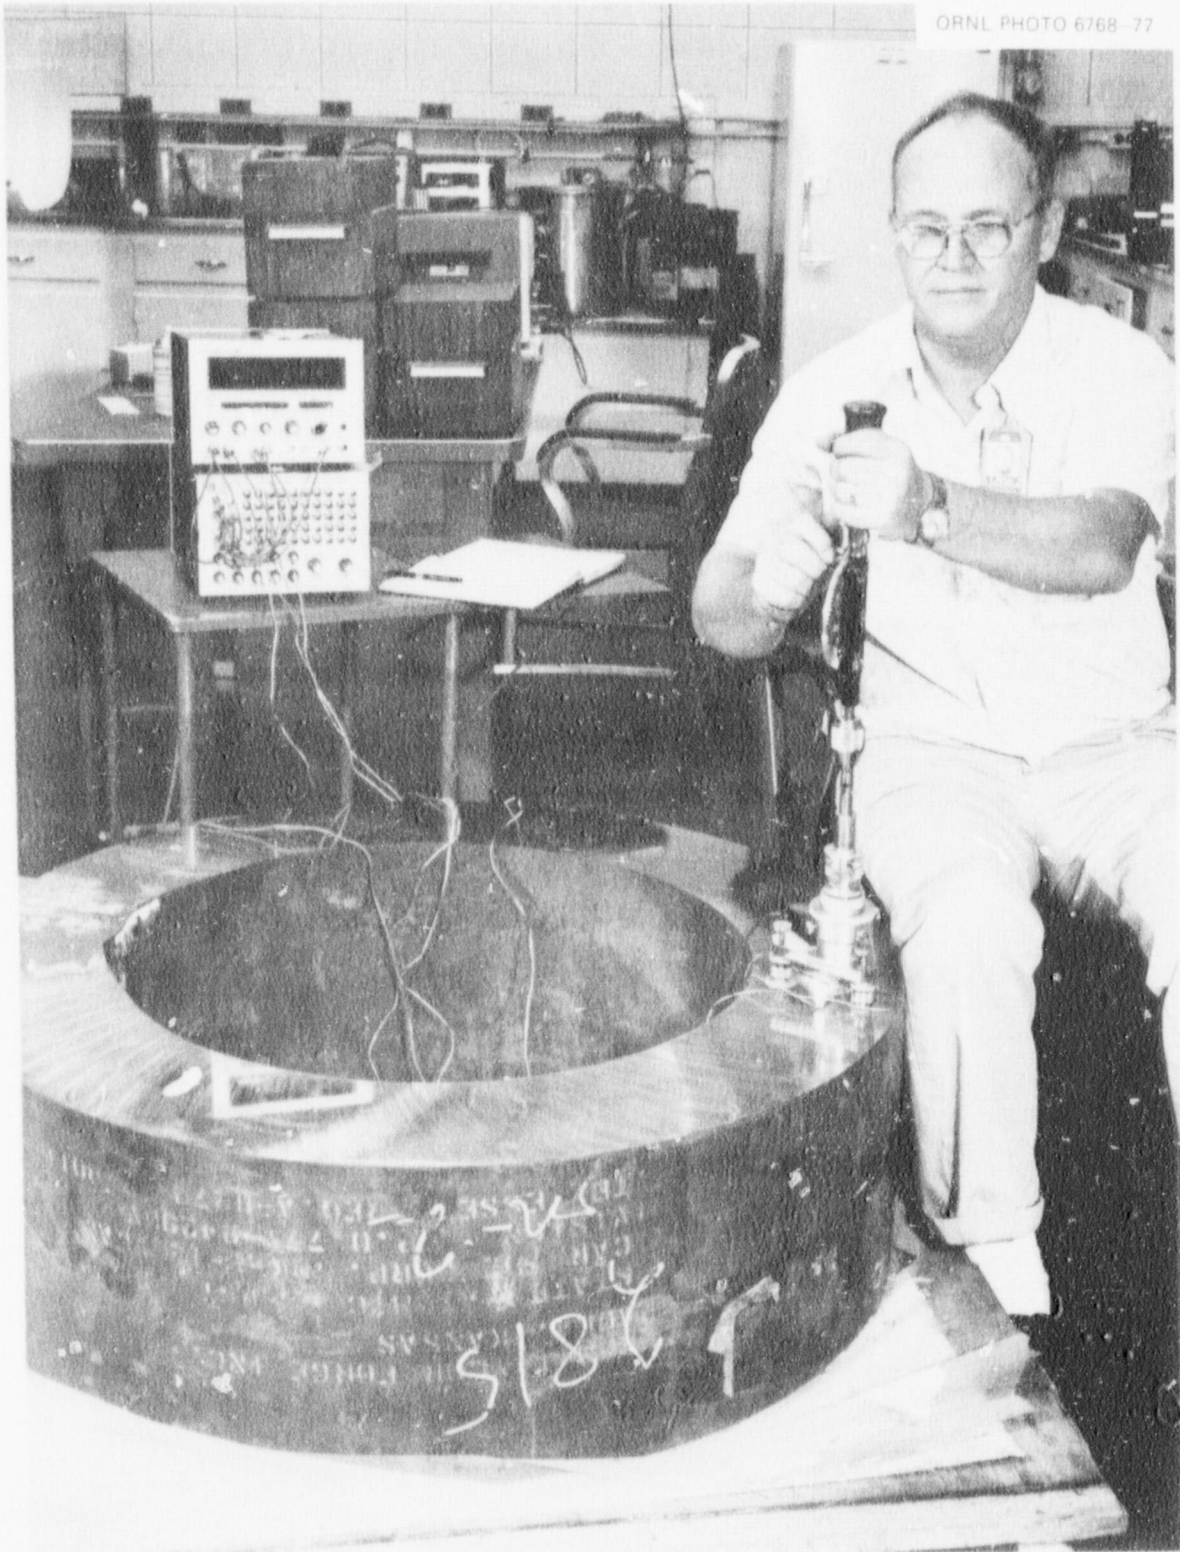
Through-thickness residual stress measurements being made on the V-7B prototypical repair weld by means of the hole-drilling technique.
